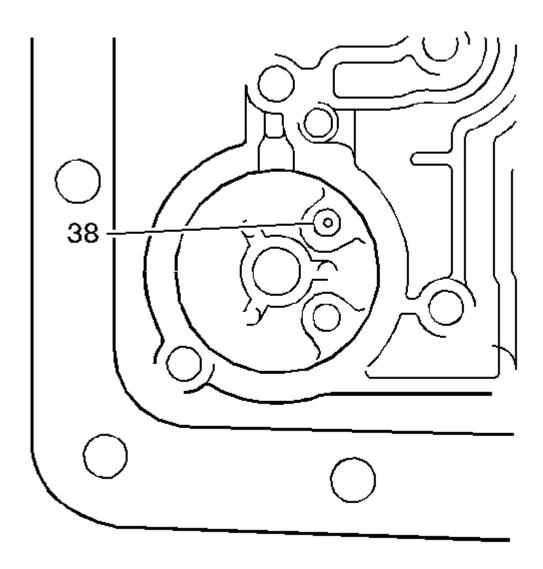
Locating Orifice Cup Plug Courtesy of GENERAL MOTORS CORP.
